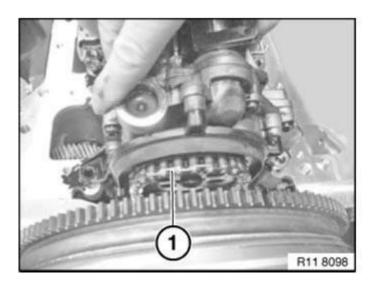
Identifying Gear Case Cover Screws Courtesy of BMW OF NORTH AMERICA, INC.
